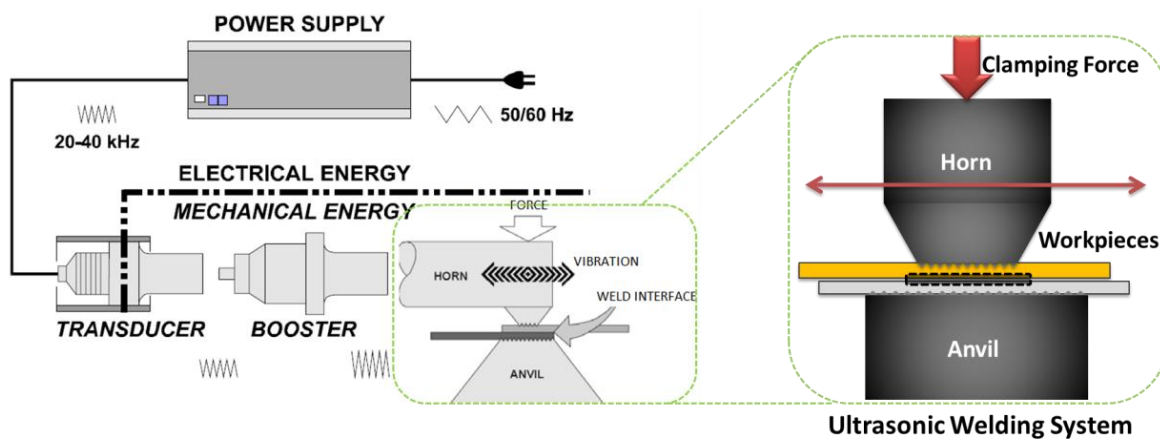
Ultrasonic welding system (Lee *et al.*, 2010)
